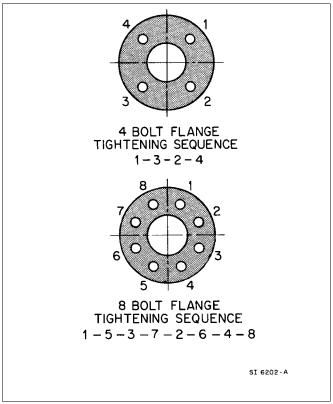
RECOMMENDED FLANGE BOLT TIGHTENING SEQUENCE
